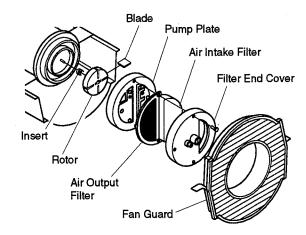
Rotor Location, Models 2E510D and 2E511C
